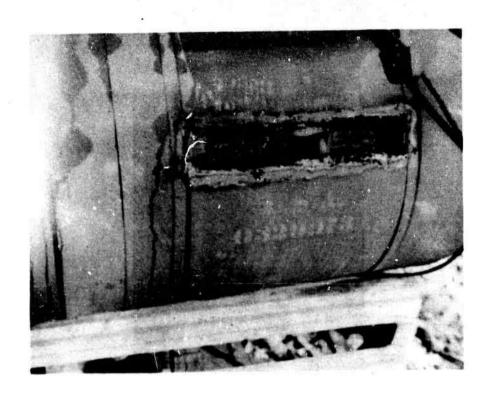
JACKET AND ASBESTOS INSULATION CUT AWAY AND HOOK EYE WELDED TO TANK PROPER
